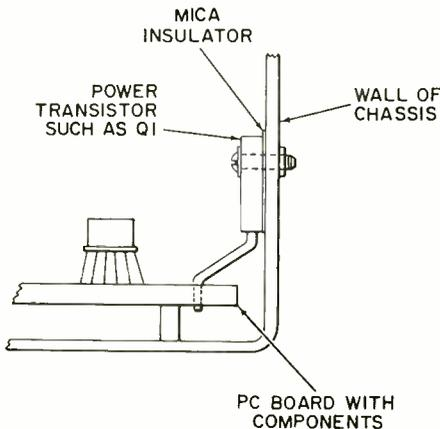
RECOMMENDED HEAT-SINK arrangement for power transistors in Figs. 1 & 2.
